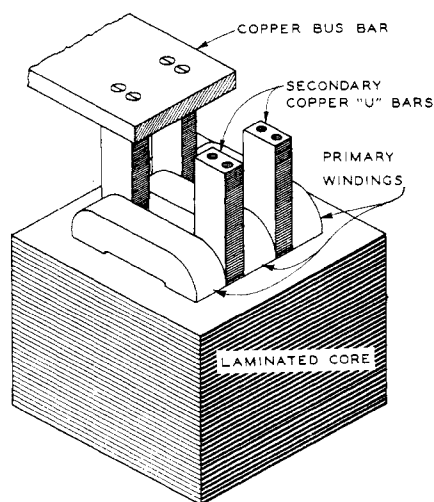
Rather than windings, the transformer has a secondary which leads directly to the bomb
